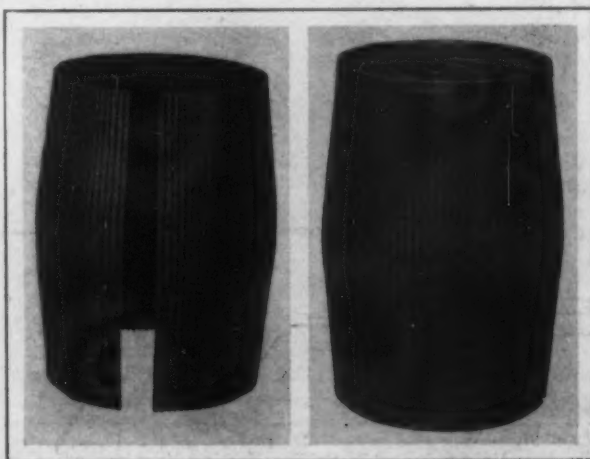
The Shell of the Barrel Fig. 2—The Finished Barrel Two Views of a Steel Slack Barrel Made by the Inland Steel Company, Chicago, Ill.
